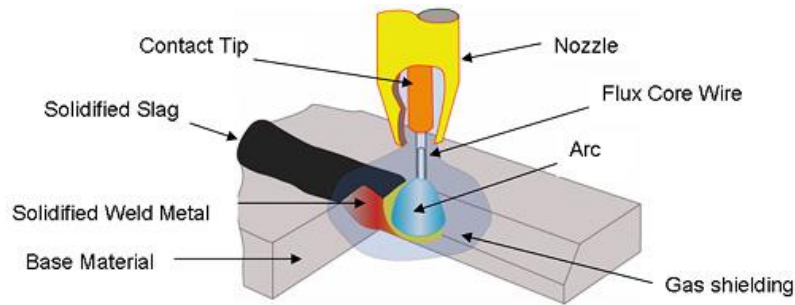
Flux Cored Arc Welding, process 136(Welding technology or techniques, 2016)
